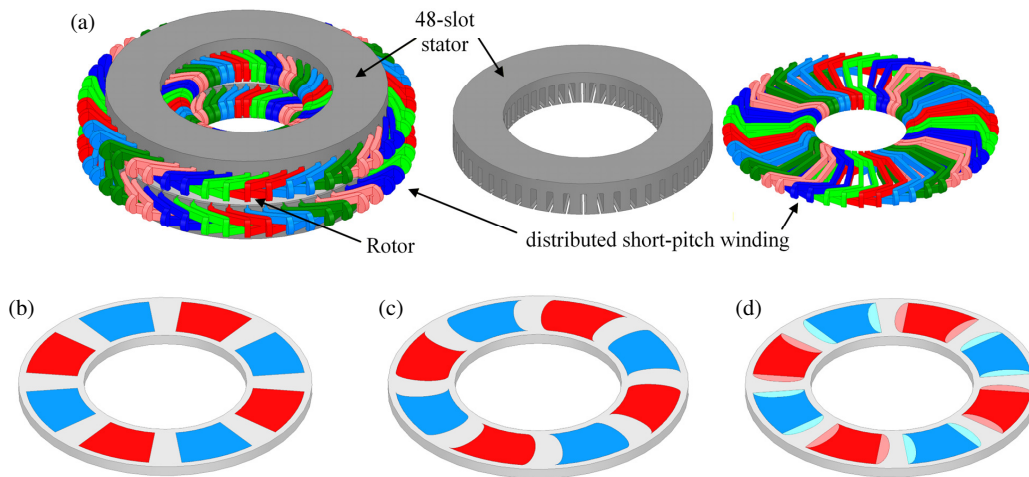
Machine topologies. (a) Stator structure of three machines, (b) CAFPM rotor, (c) EC-RP AFPM rotor, and (d) EC-RCHP AFPM rotor.
